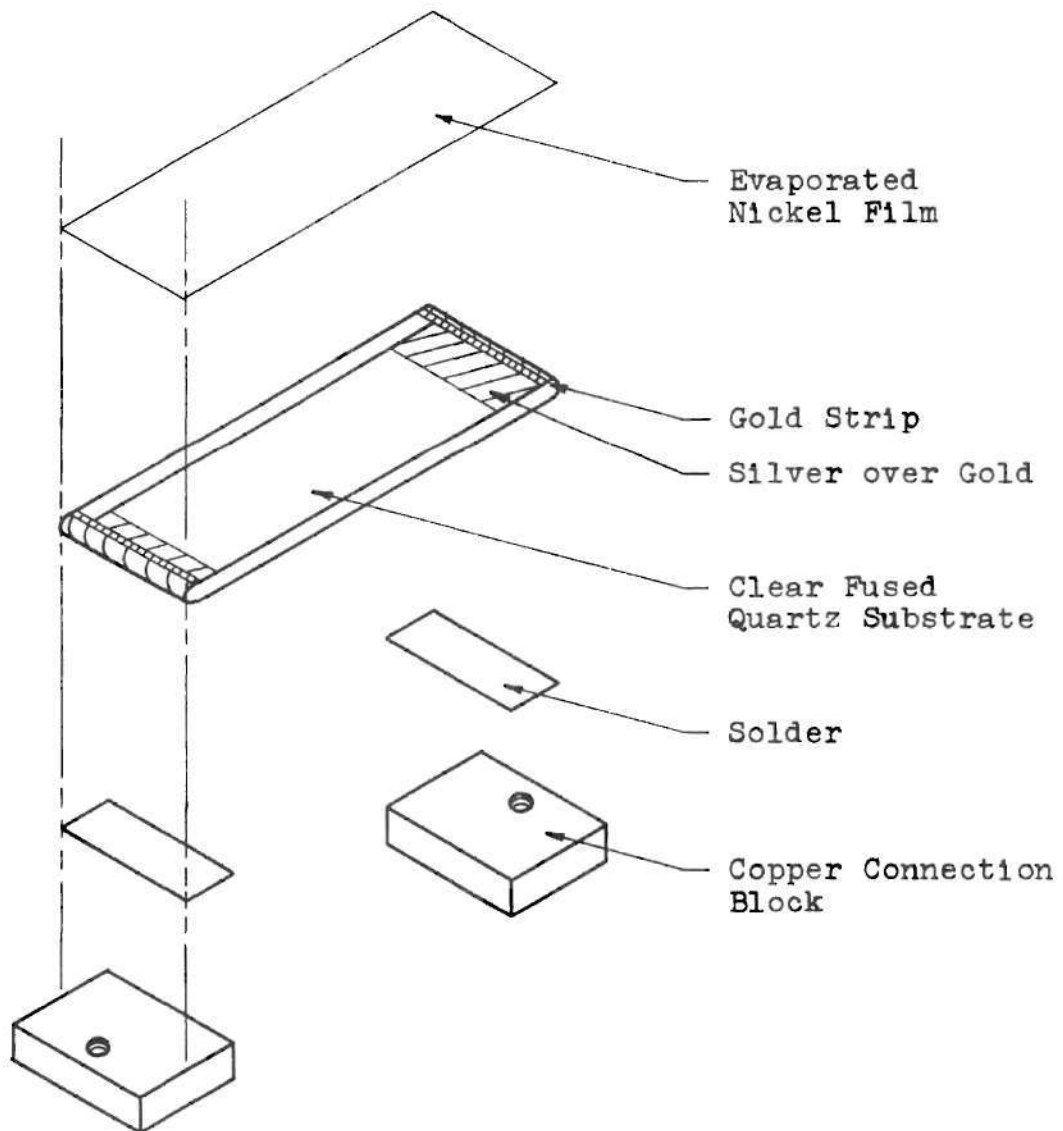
Exploded View of Thin Film Heat Transfer Element.
